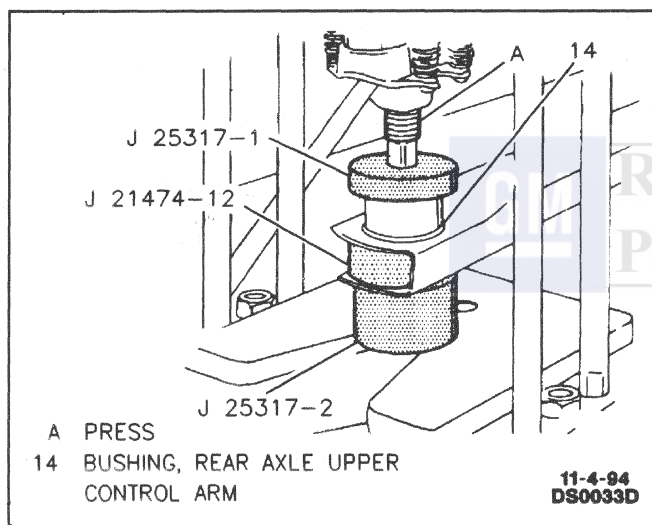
Installing Rear Axle Upper and Lower Control Arm Bushings
